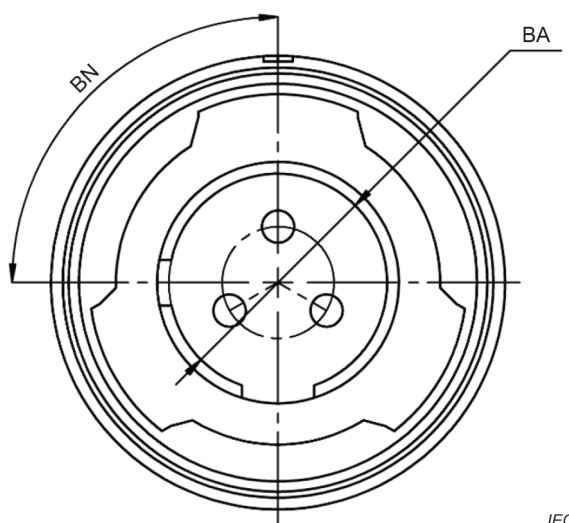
Front view of the female side of the push-pull housing for C-coding
